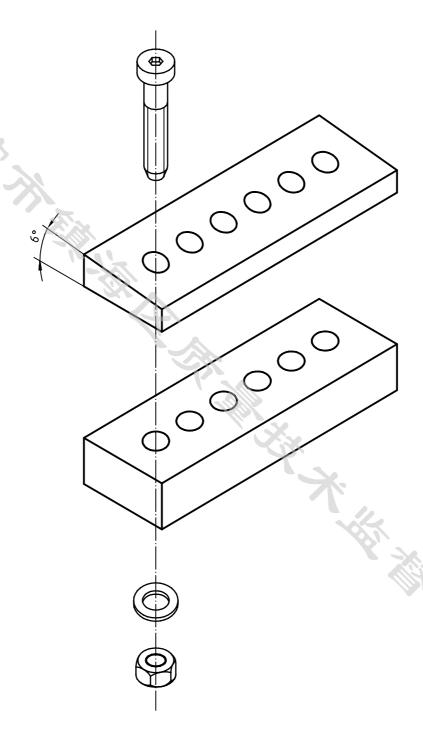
Schematic diagram for testing of threaded articles and rods — Example of a 6° wedge and parallel filler plate (see Introduction for examples of threaded components)
